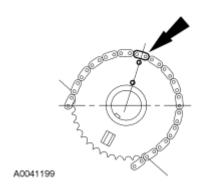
Aligning Copper (Marked) Link With Timing Mark On Camshaft Sprocket Courtesy of FORD MOTOR CO.
